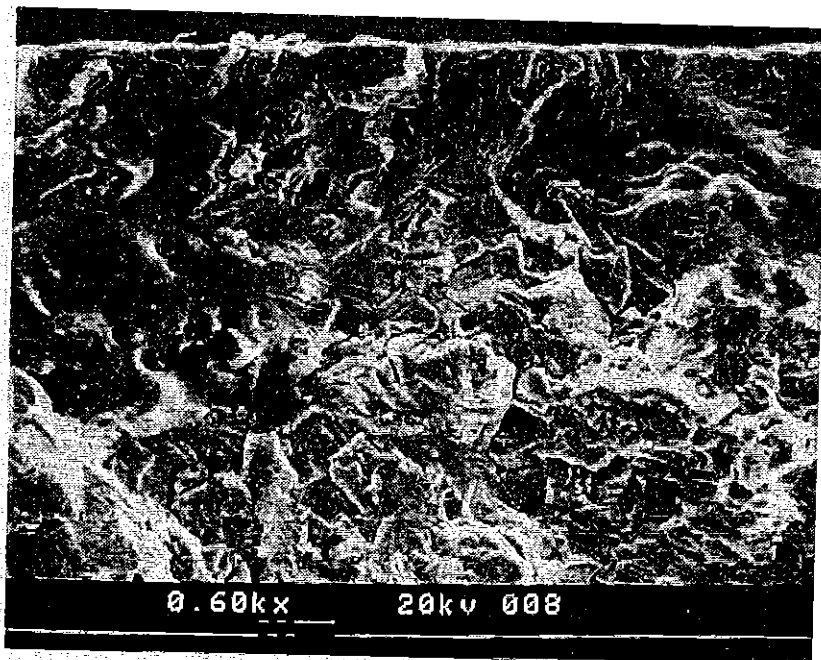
Fracture surface at center of semielliptical crack initiation. (spec 3x1.5 in (7.6x3.8 cm)) ($P_{\max} = 1400$ lb (6227 N), $\Delta K = 12$ MPa \sqrt{m} , $\epsilon_1 = 6082$ $\mu\epsilon$, $N_f = 286,270$)
